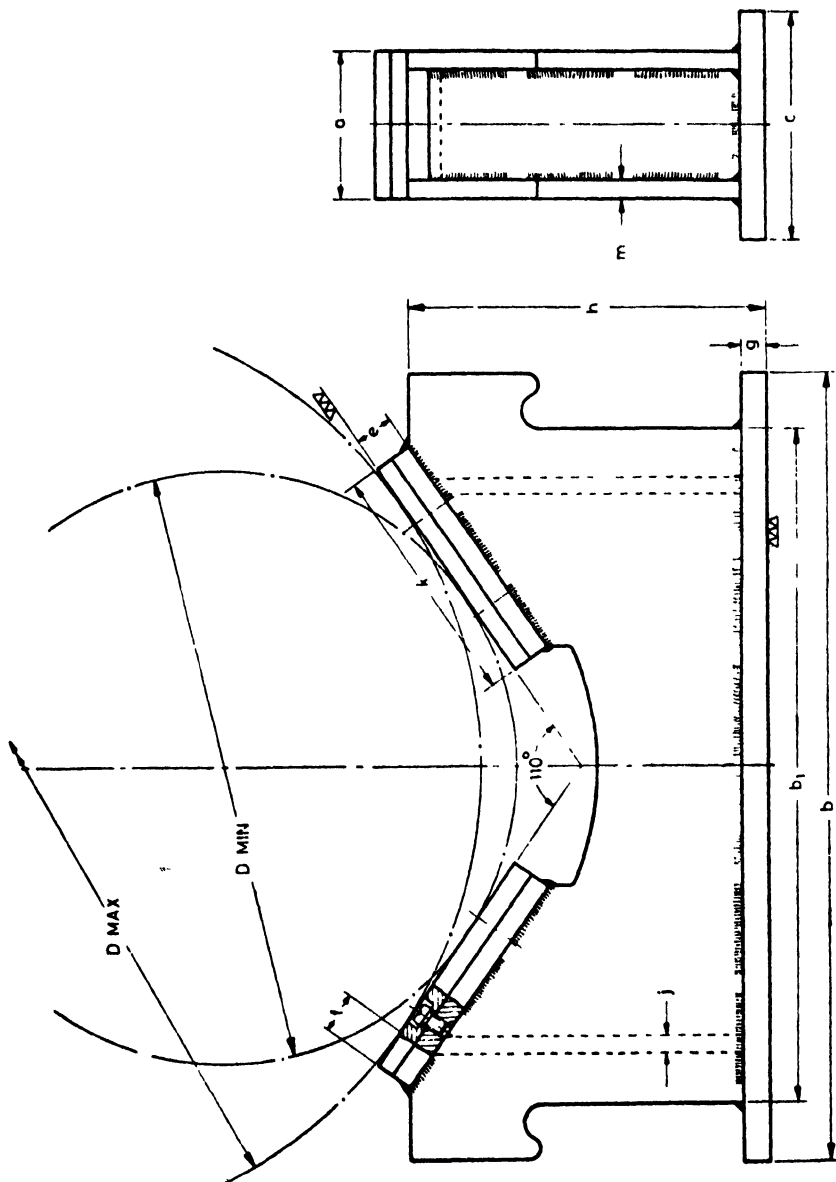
DIMENSIONS FOR V-BLOCKS, SIZES 1 400 AND 2 000 mm
